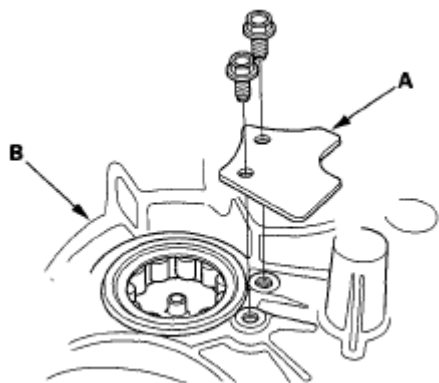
Identifying Bearing Set Plate And Clutch Housing
